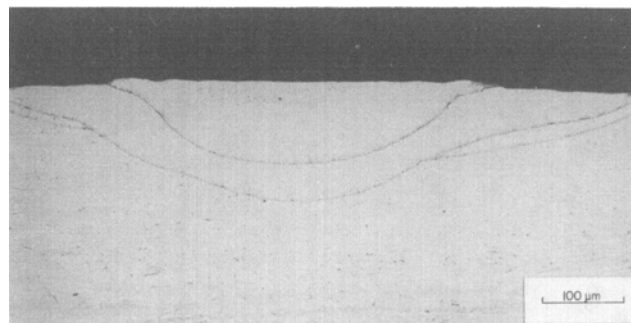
Transverse macrograph of the fusion zone, indicating the interfaces where successive puddles overlapped for power level of 200 W and welding speed of 254 cm/min.
